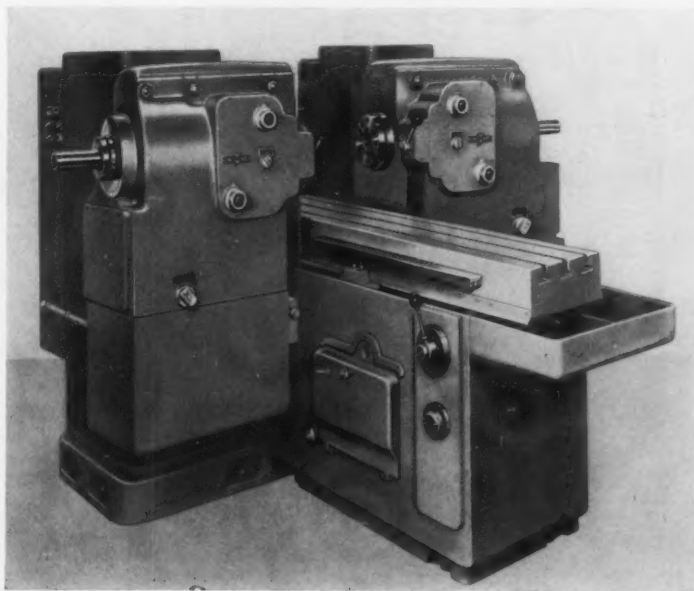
Duplex style Cincinnati "Powermatic" milling machine
